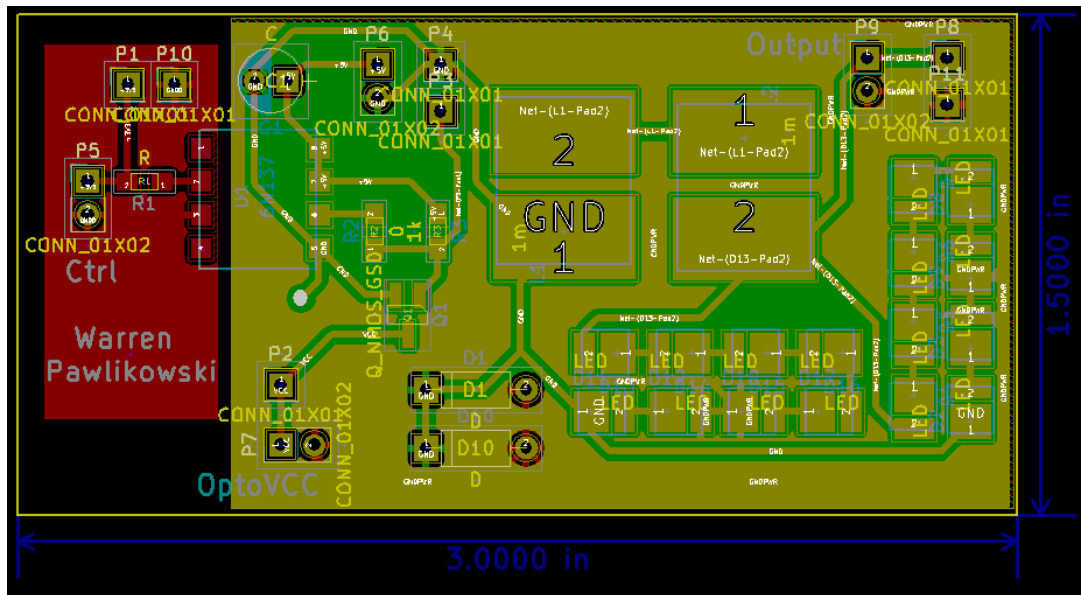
Printed Circuit Board (PCB) Layout of LEFD converter prototype.
